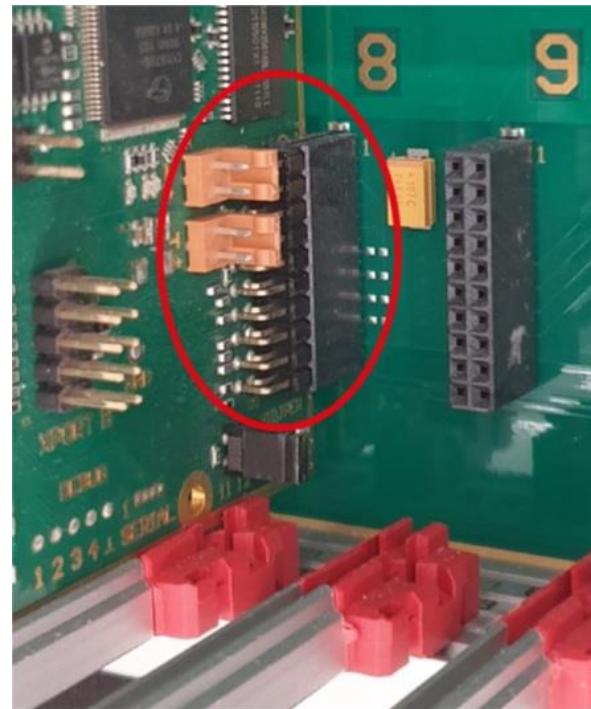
Main Video Card in Horizontal Guidance, Snapped in, 21-Card Chassis Backplane
